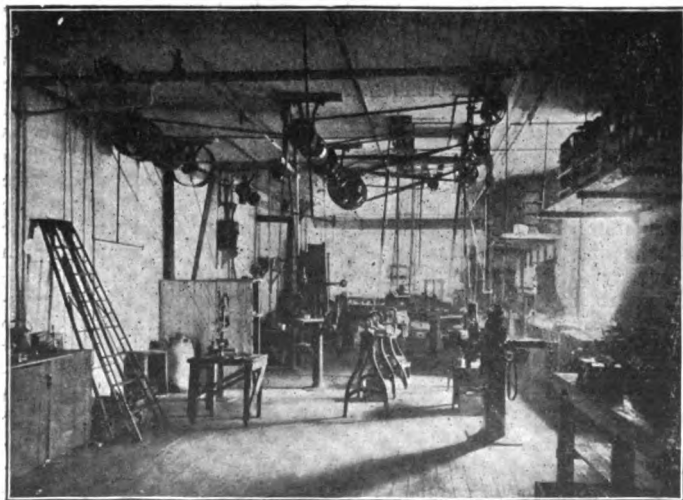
NEW MACHINE SHOP OF DE VEAU & CO.
